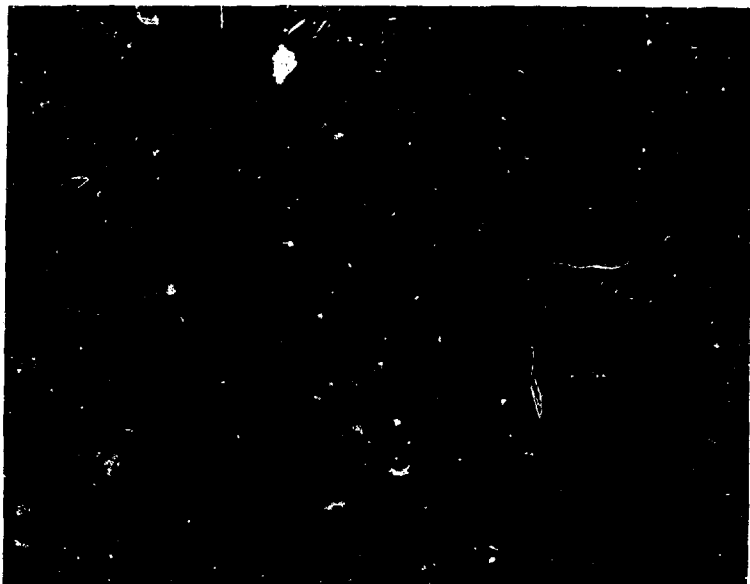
Moore diamond tool #L-44. (b) Front view showing flank wear, 337X.
